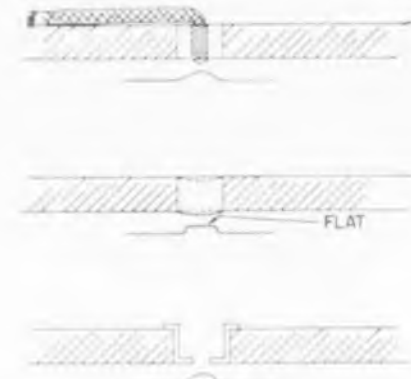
Various methods of hermetic sealing include (top) molded-in contact point, (middle) indium or solder-filled insert making contact with shaved dot and (bottom) metal shell insert for solder filling.
